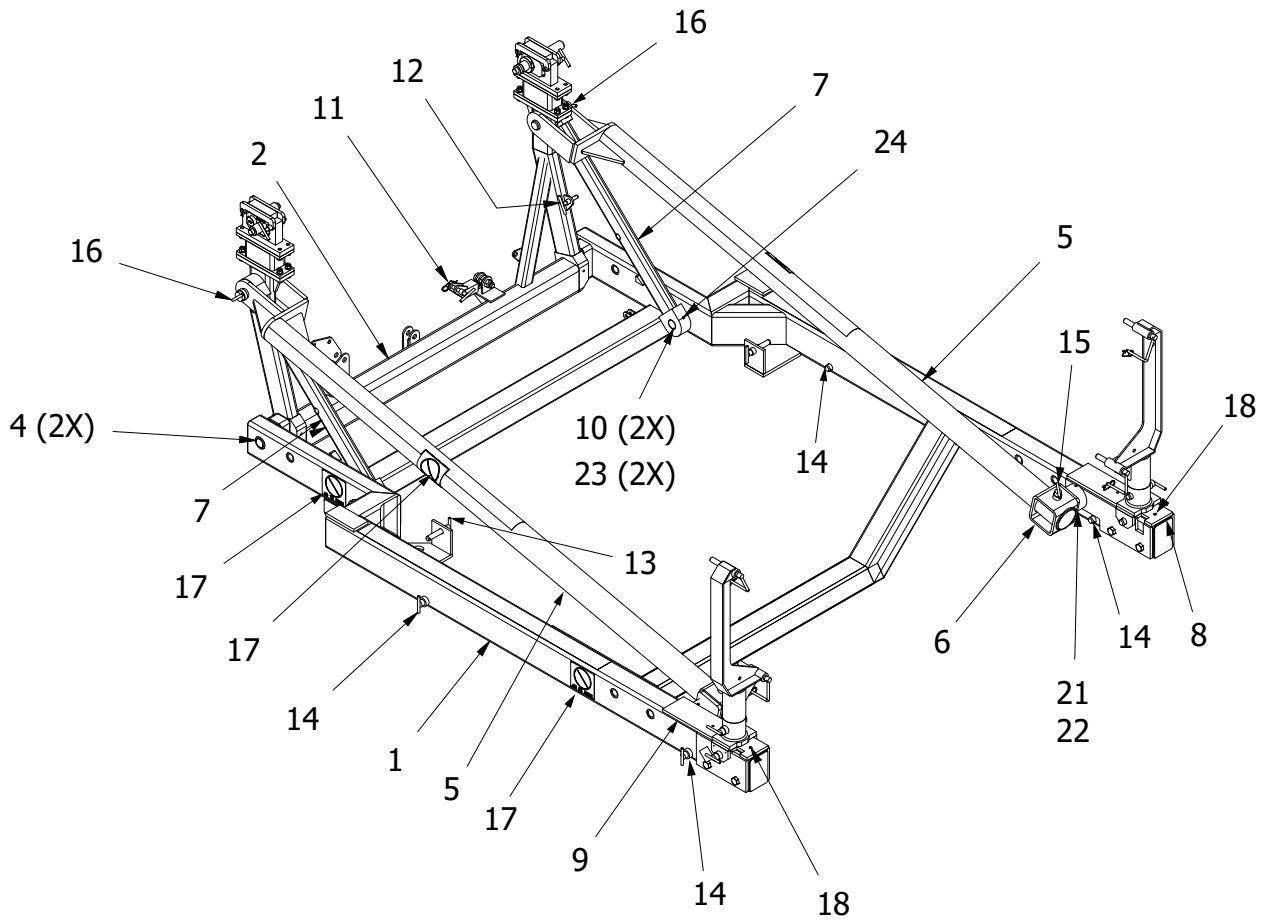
AM-1928-156-80A Cradle Assembly w/o Bootstrap Adapter for CF6-80A
